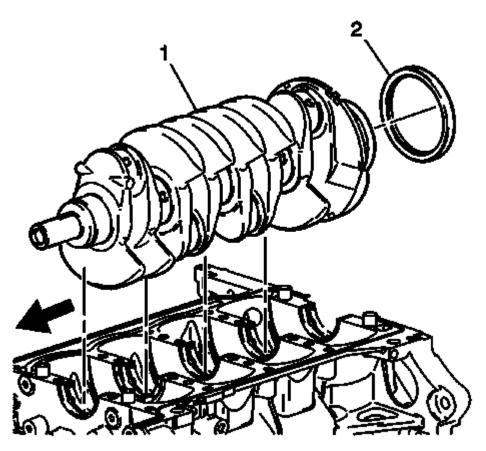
Crankshaft And Rear Oil Seal Courtesy of GENERAL MOTORS COMPANY
